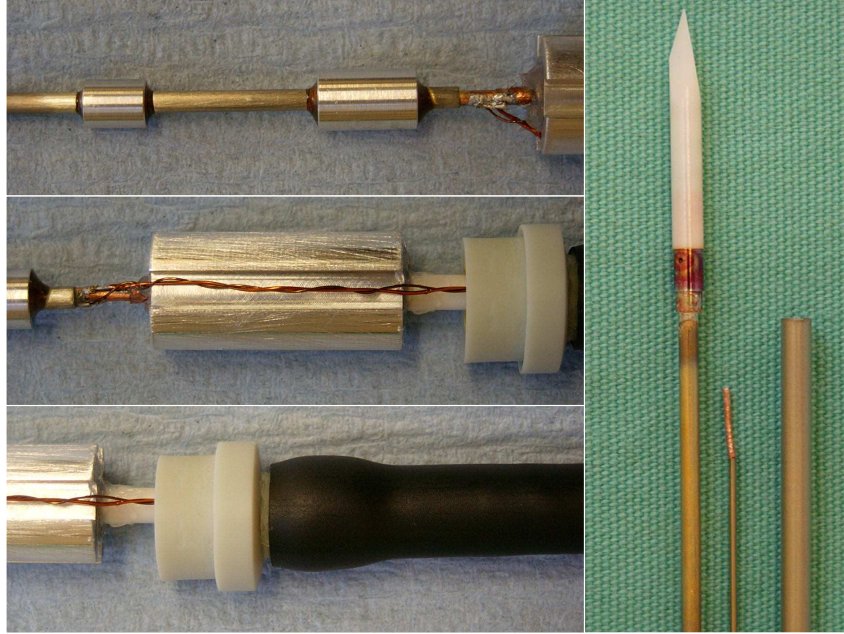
Fabrication of handle (left) and antenna (right) during assembly of 1.8 mm prototype system.
